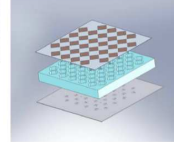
"Exploded" view of the 5x4 checkerboard array.
